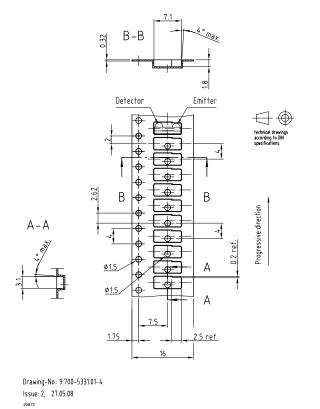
Tape for 1.6 - mm Package Side View Oriented for TR-4 Version
